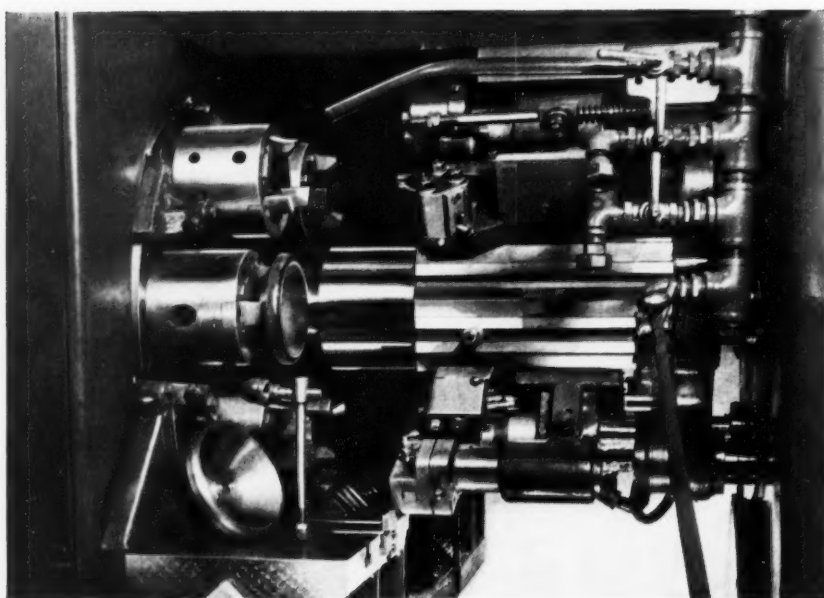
Chucking Type Gridley Automatic Equipped for Completely Machining the Bowl-shaped End of a Milk Separator Part
